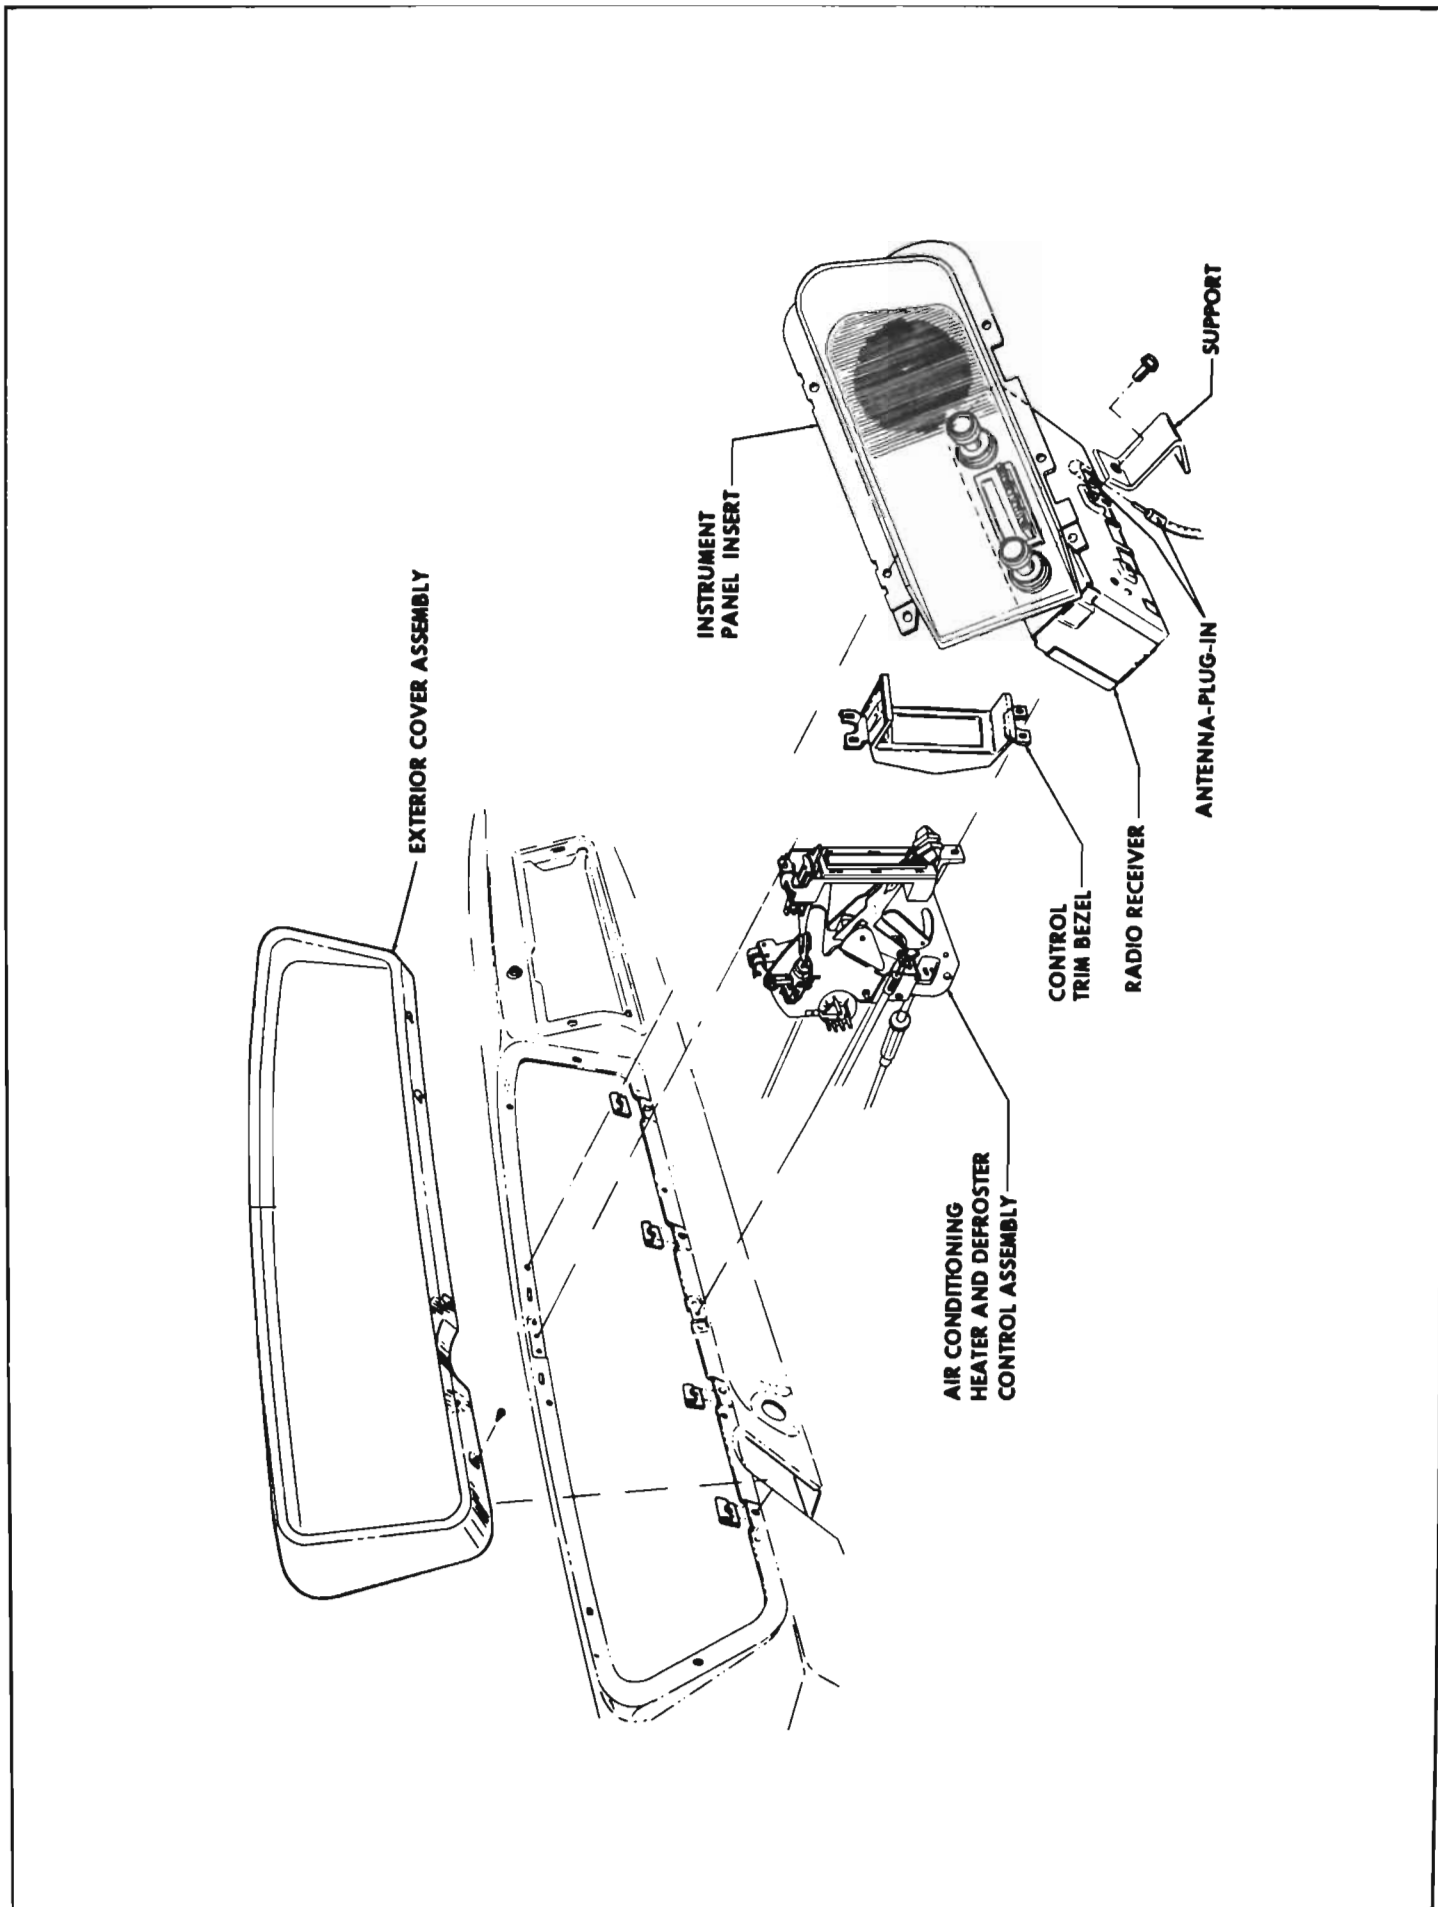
Air Conditioner Heater and Defroster Control Assembly Installation
